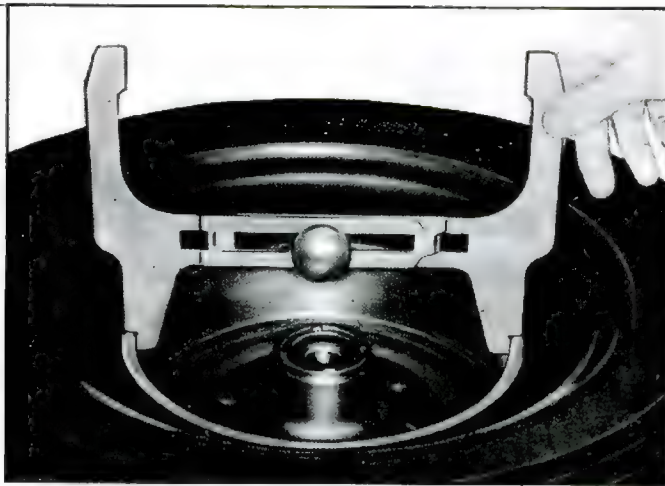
Using Drum-to-Brake Shoe Clearance Gauge
